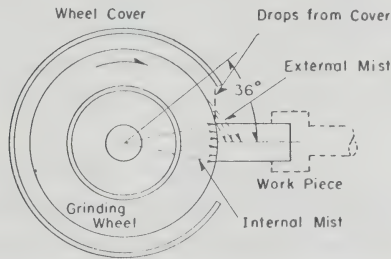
Formation of Mist in Through Wheel Coolant Grinding.
